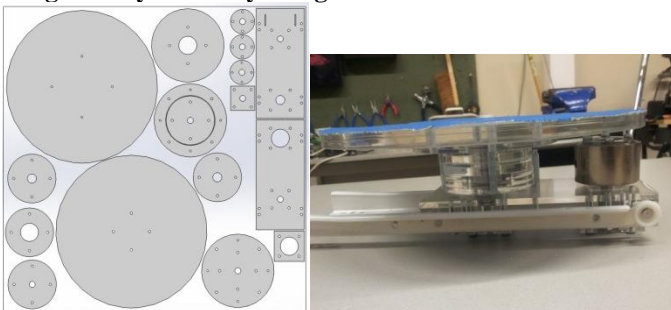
Showcase of laser cut parts of 10mm thickness, this figure shows the main discs for the elastic actuator, and the smaller discs for mounting the spring assembly of the bottom disc. The top right of the left figure shows the base slide assembly that allows the system to change its stiffness.
